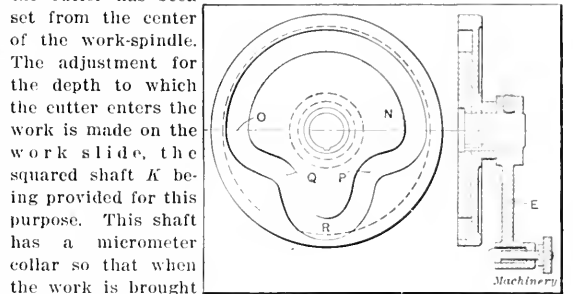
Cam Mechanism for changing the Cutter Speed Gears
